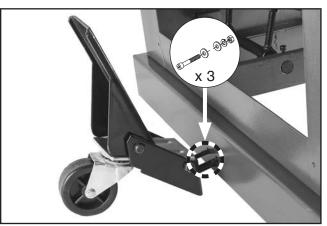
Attaching foot-pedal caster assembly to bottom of machine.
